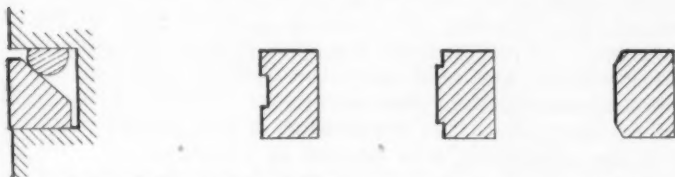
EXAMPLES OF TYPICAL PISTON-RING CONSTRUCTION
